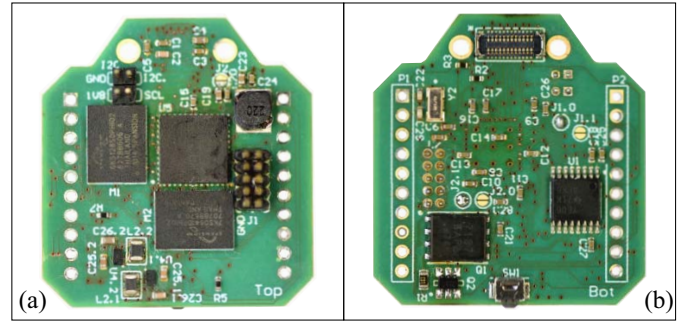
PULP-Shield* pluggable PCB. (a) Top view. (b) Bottom view.
